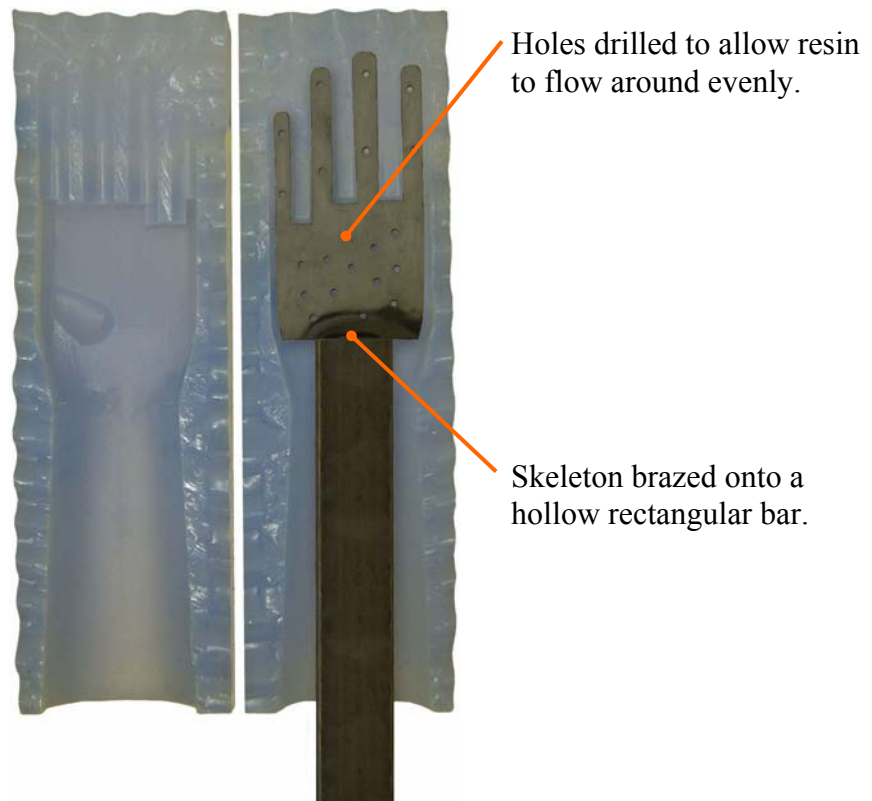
The skeleton positioned inside the silicon mould before casting.
